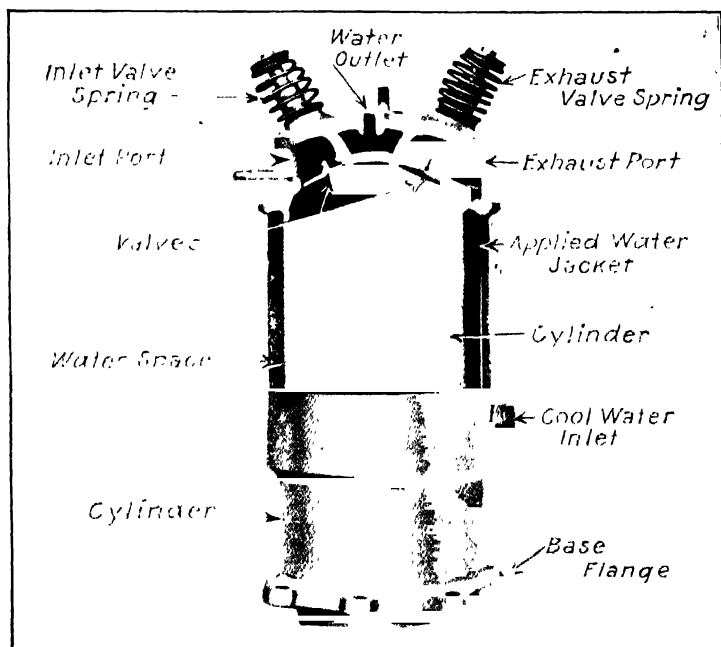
Part Sectional View, Showing Valve Arrangement in Cylinder of Curtiss OX2 Aviation Engine.
